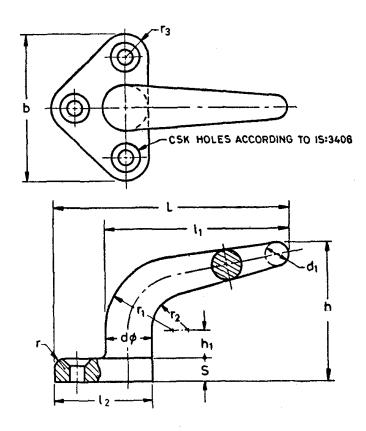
Single Horn Cleat — Bolted or Riveted Type
